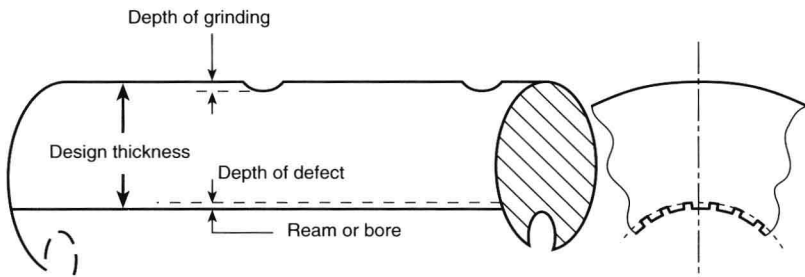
Pressure Vessel Grinding and Boring to Remove Defects
